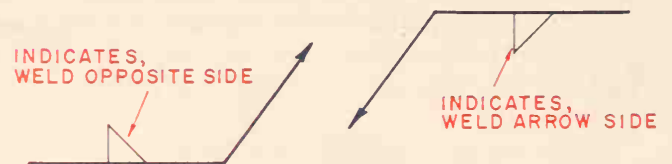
Welding symbol placed *above* the reference line means to weld OPPOSITE side. Welding symbol placed *below* the reference line means to weld ARROW side.
